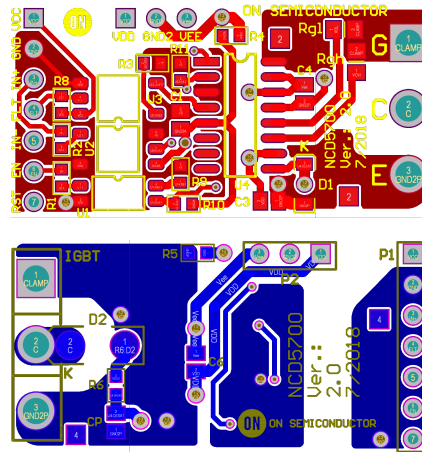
NCD5700 mini Board TOP/BOTTOM Layout Drawing
